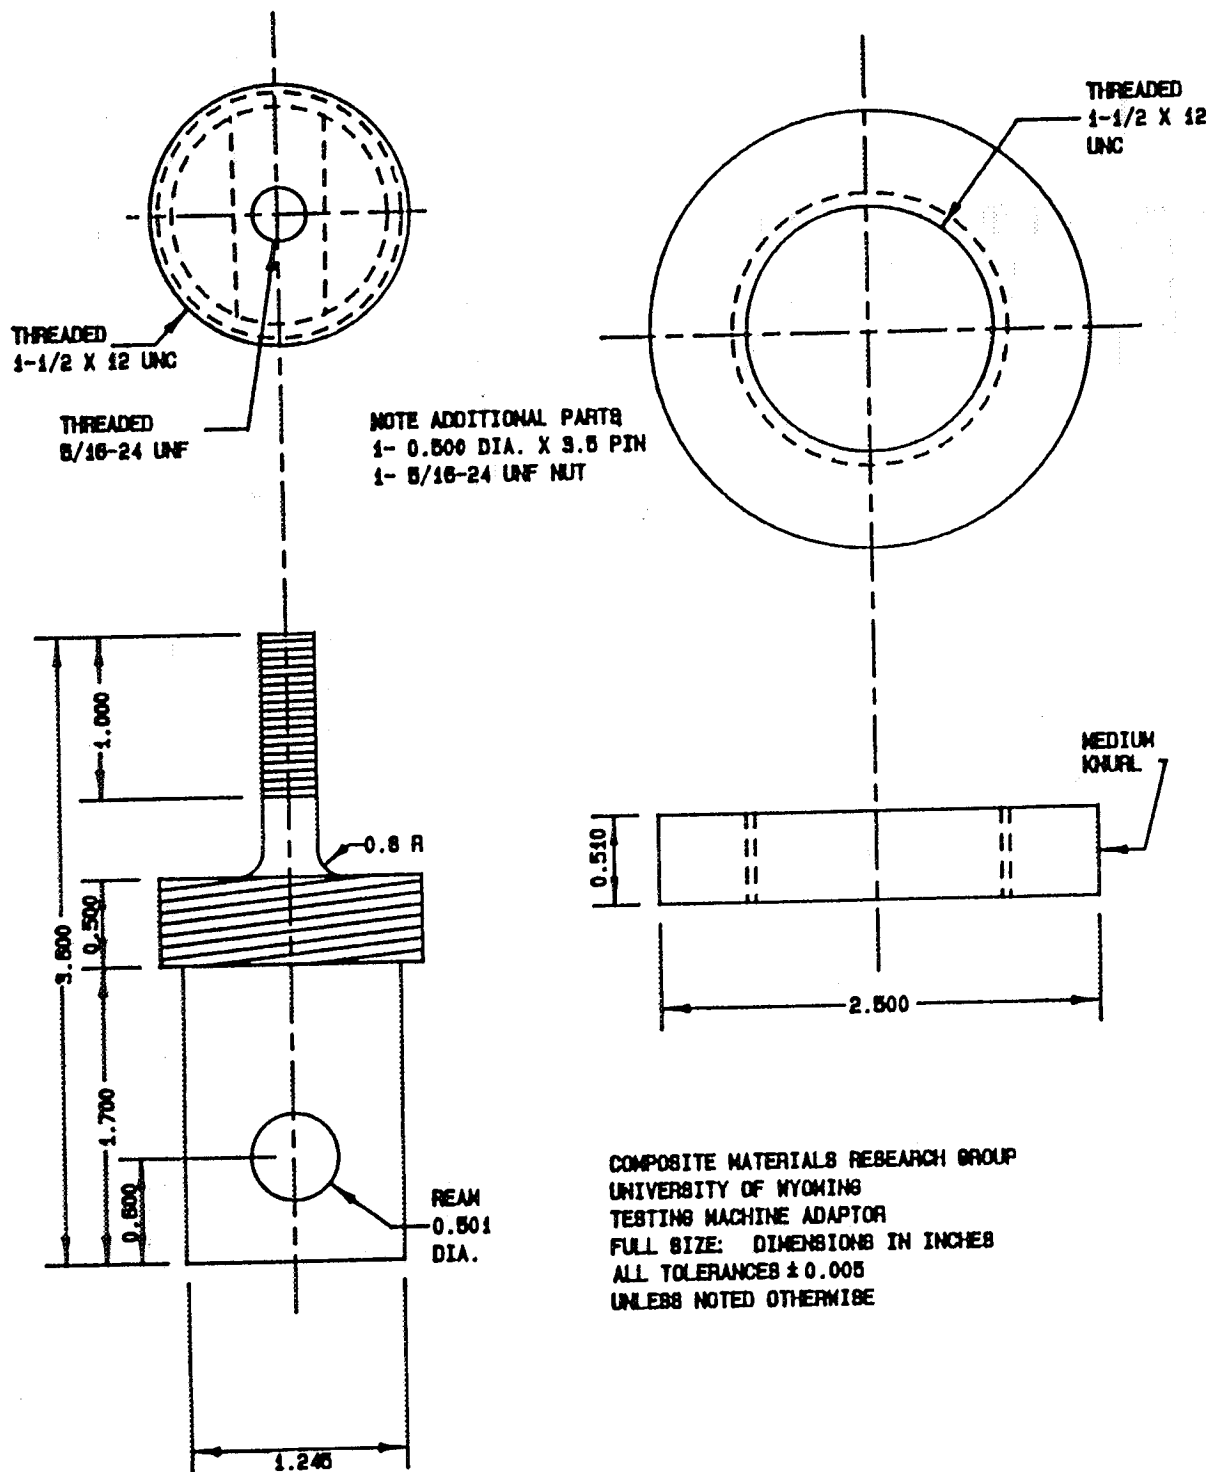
Iosipescu Shear Fixture Loading Adaptor.
